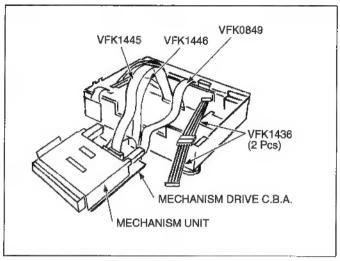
Service Position for Mechanism Drive C.B.A.
